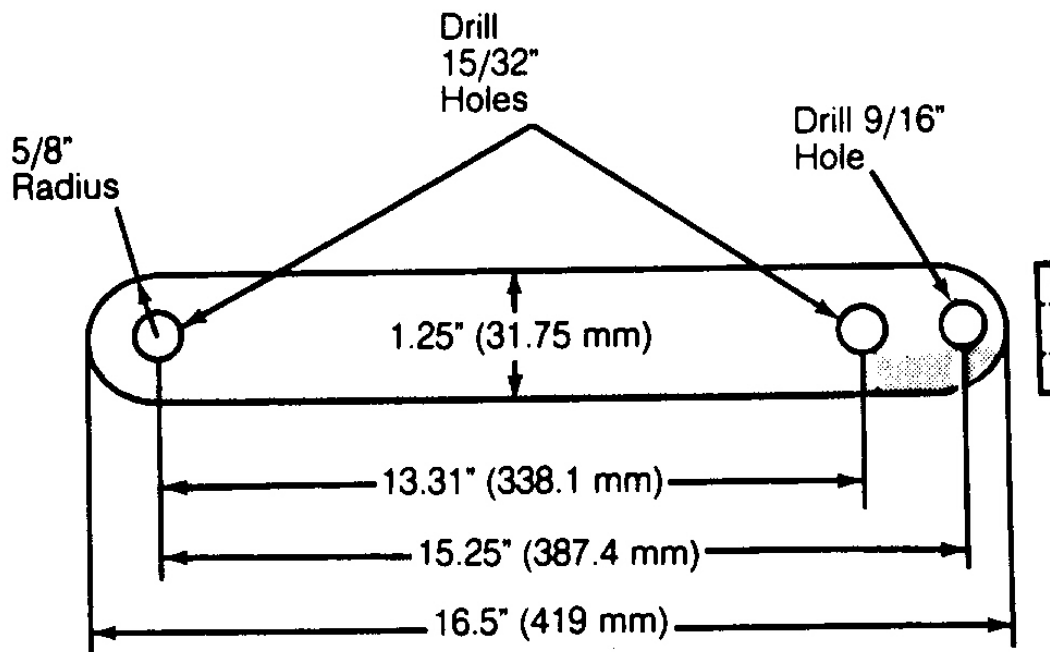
Fabricating Torque Converter Hub Seal Cup
